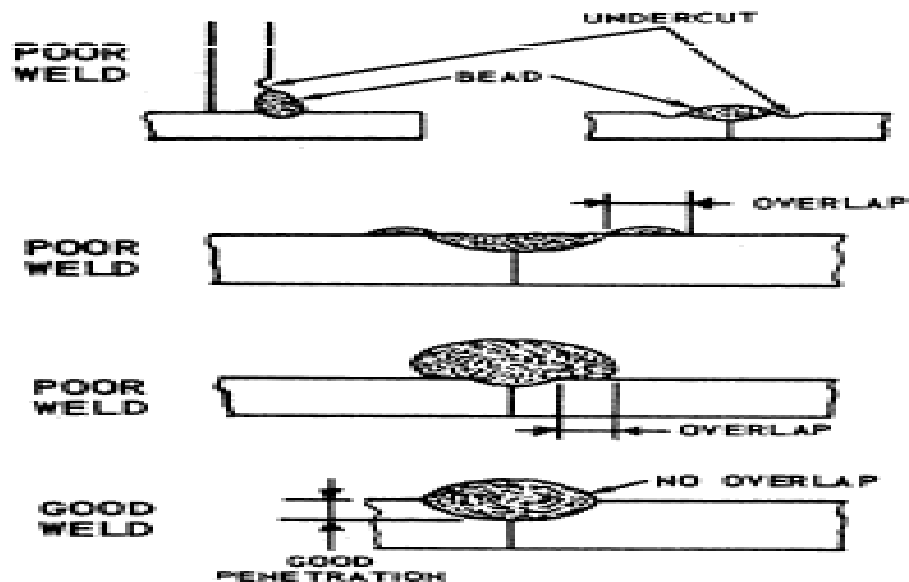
Undercuts and overlaps in welding.
